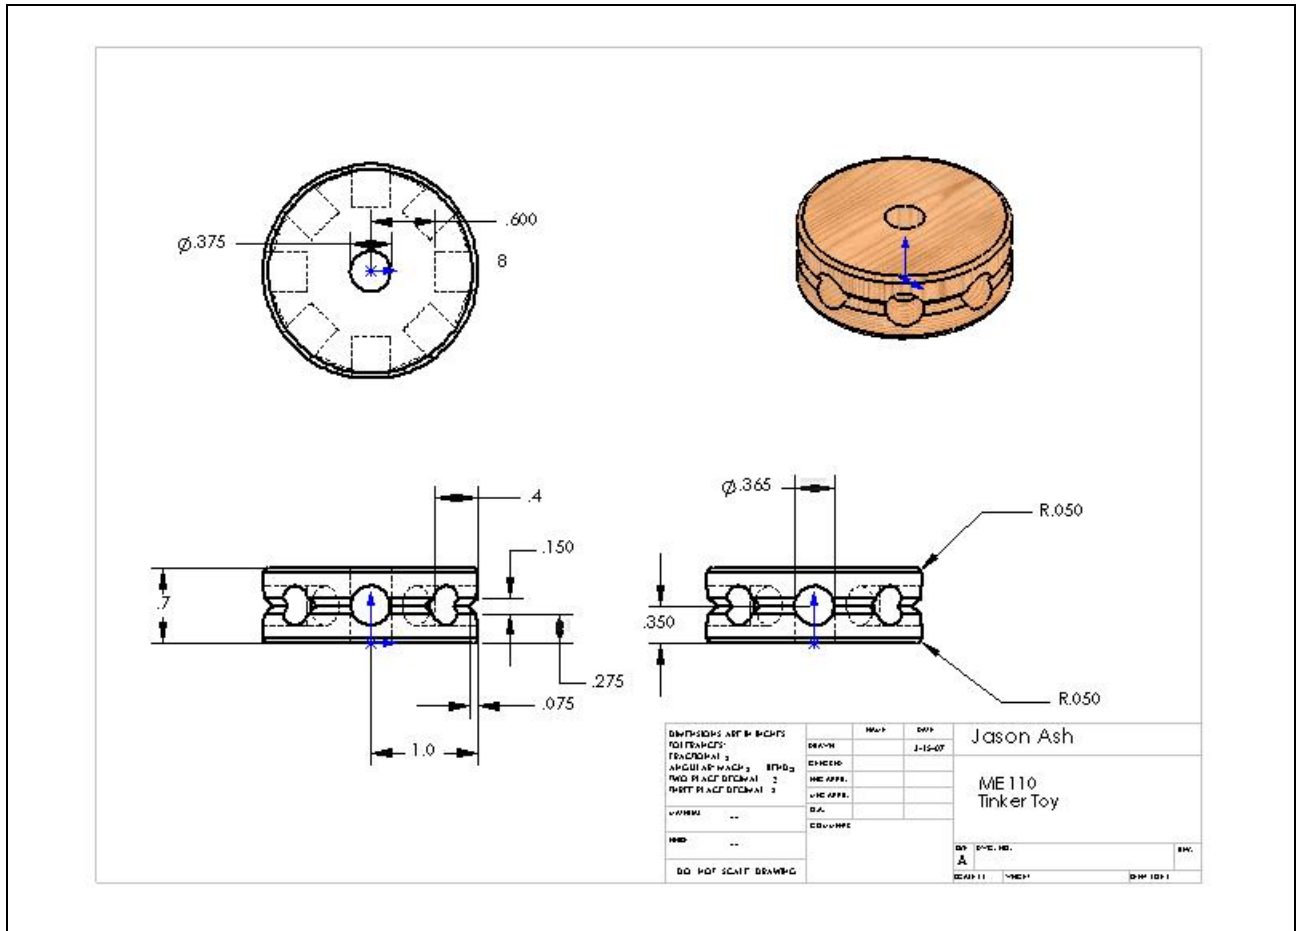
Final drawing to be submitted of tinker toy using circular pattern (dimensioning required)
